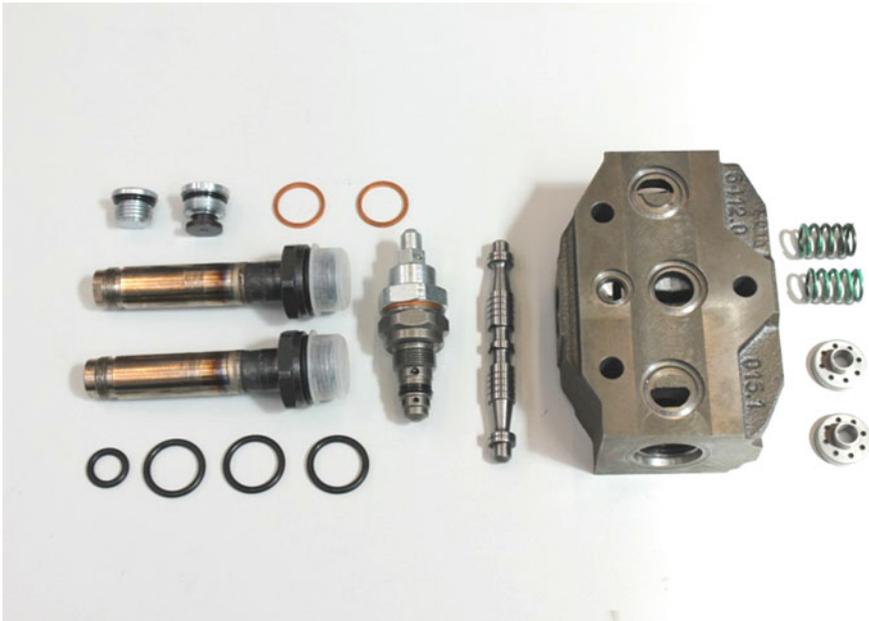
Different parts of hydraulic valve system before assembly with the main component as the housing
